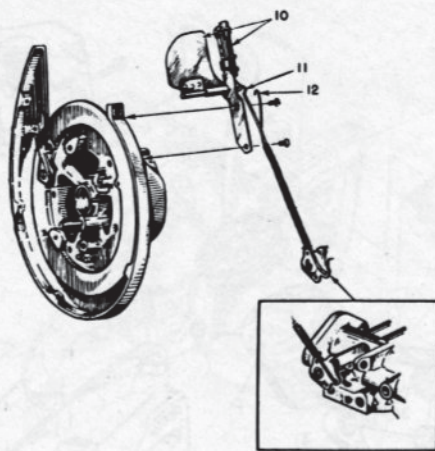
Model 775G governor and adjusting slide assembly; adjust governed speed by turning screw on slide. Governor spring (12) connects to adjusting slide and lower end of spring is threaded onto burr washer on rod (11). Hook rod to throttle arm hole numbered (4) (Fig. HL215).
